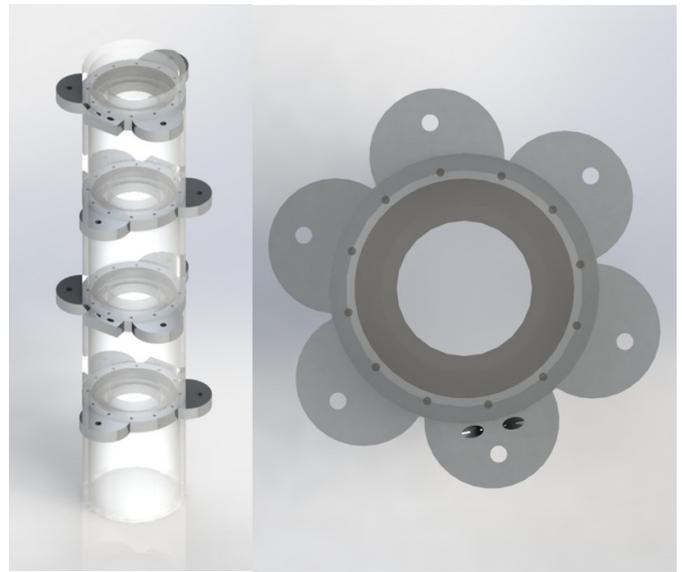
Acrylic cable guiding plates embedded in silicon finger. The silicon finger has a single pneumatic channel in the middle while the guiding cables are fixed at the end plate and strung through the rest of the plates. The plate has three linear constraint holes for directional constraints and two diagonal constraint holes for roll constraints.
